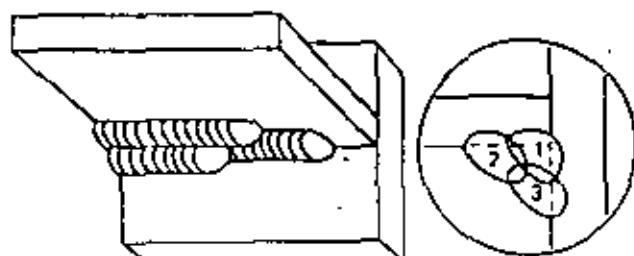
Technique for overhead and horizontal butt welds with fast-freeze electrodes. These welds are best made with a series of stringer beads.
